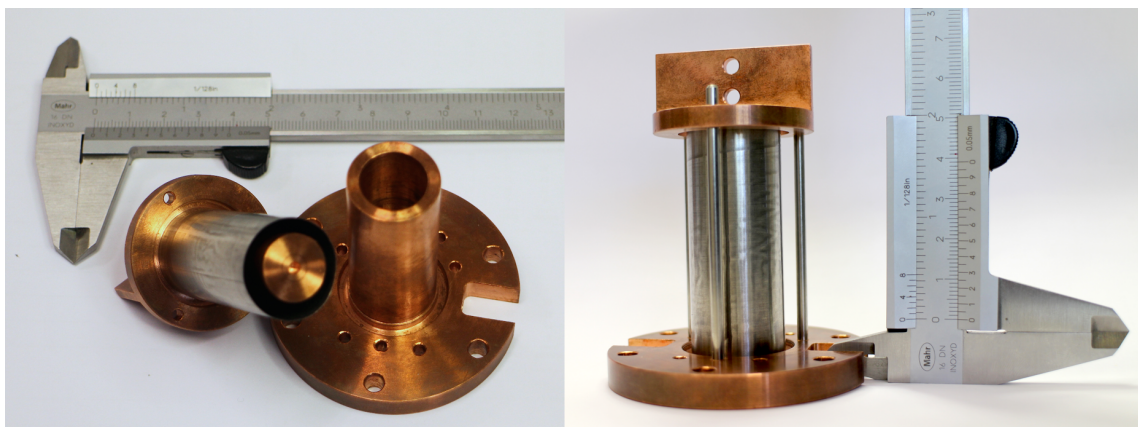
Photo of the two copper blocks and the stainless shell tube. At right, pieces mounted with alignment rods.
